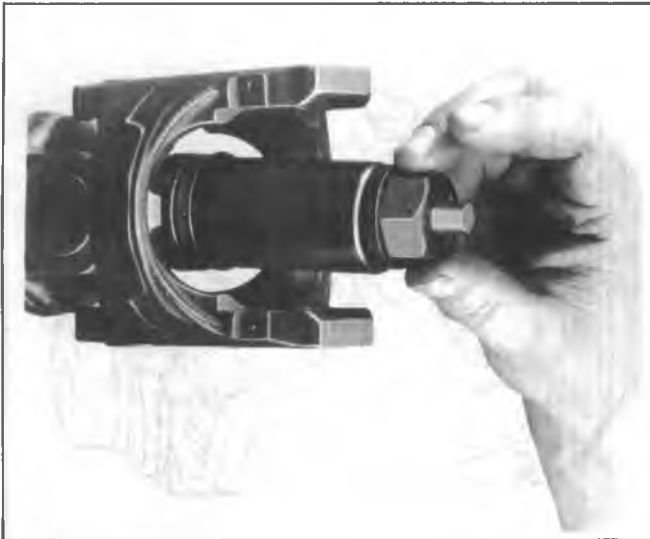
A-25--Installing Outer Cylinder of Tool J-23996 Over Ball
